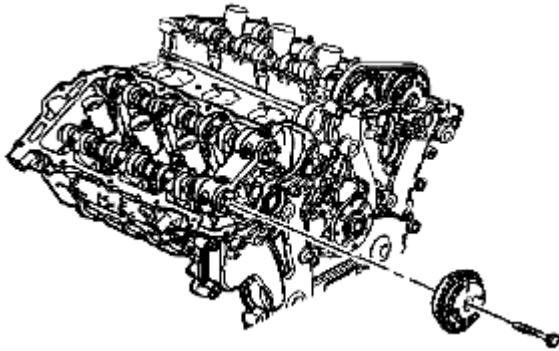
Identifying Intake Camshaft Position Actuator And Bolt
